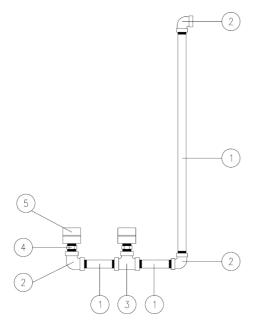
Overall dimensions and layout of 2 directional valves system
